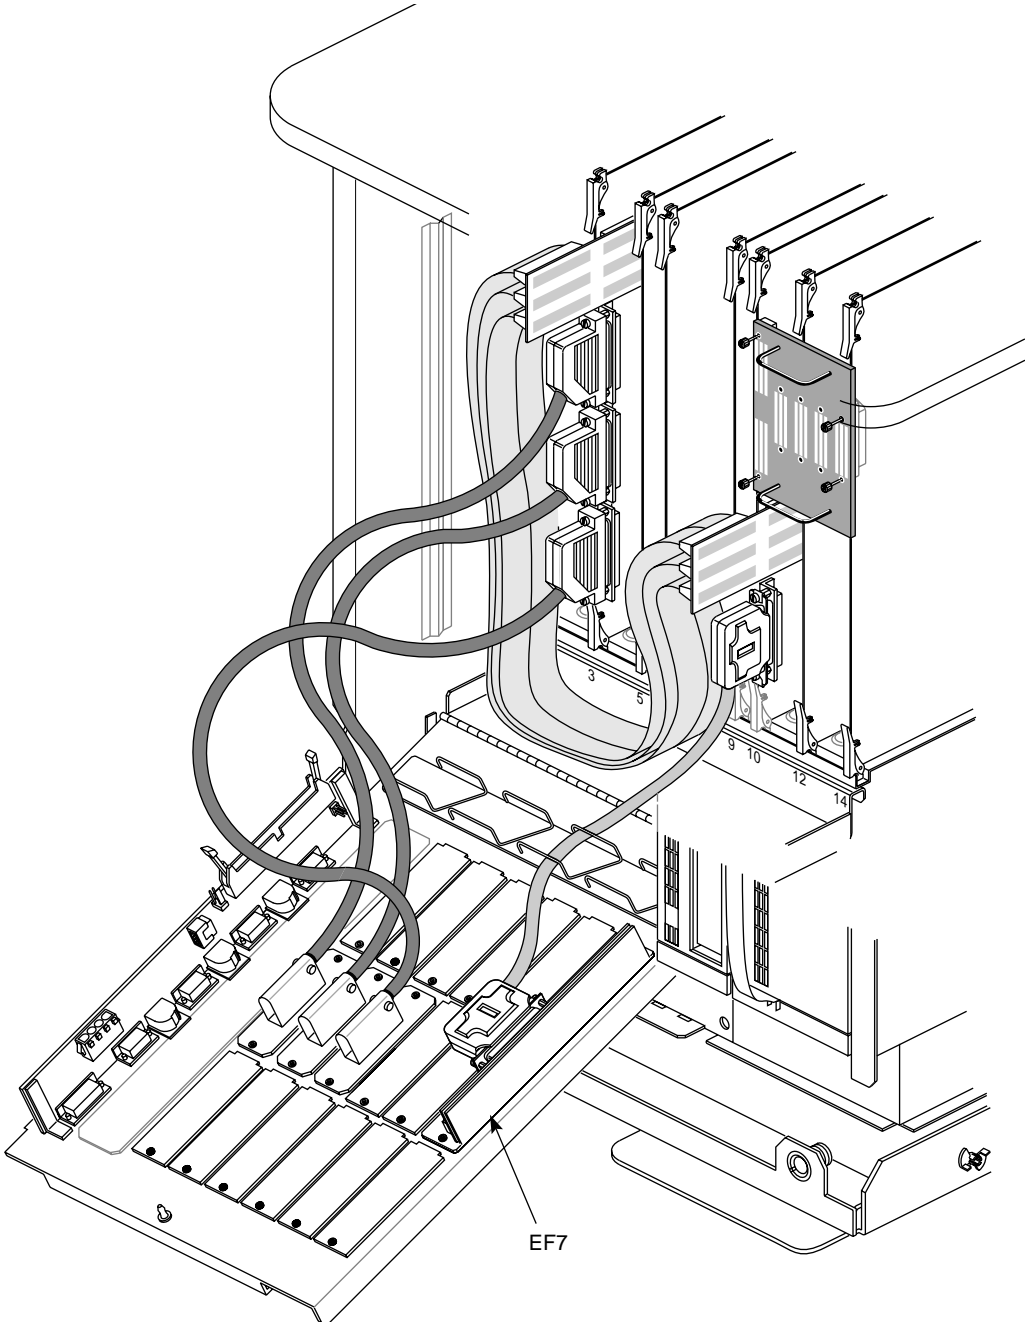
Complete Multi-Channel Option Installation for the Crimson Chassis (Breakout Box Version)
